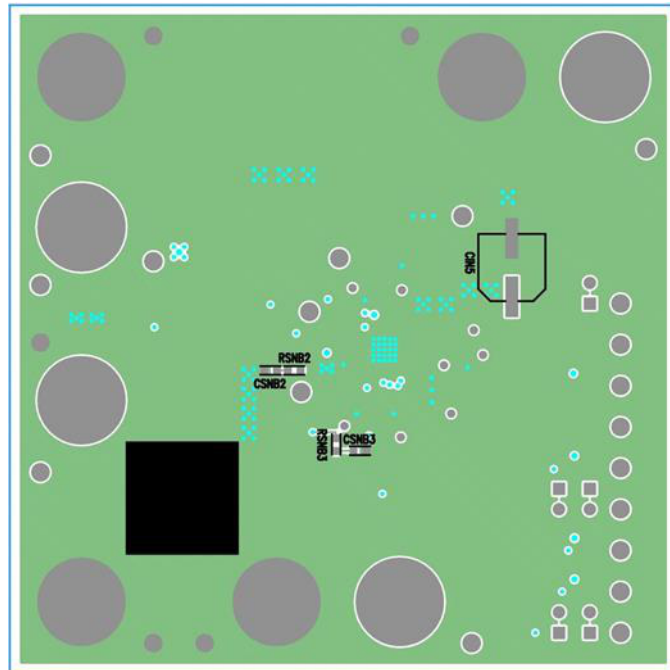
NCV97400GEVB PCB Layout – BOTTOM Layer (Mirrored)
